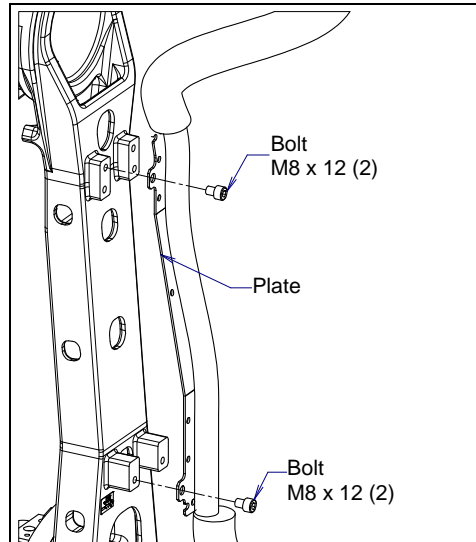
(e) Replacing the cable kit (J2 arm)
